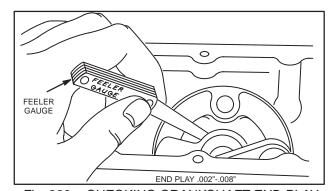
CHECKING CRANKSHAFT END PLAY
